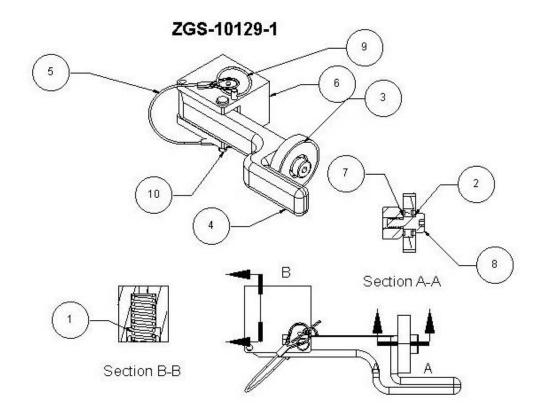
Tensioner Assembly Upper Four Groove Rollers
